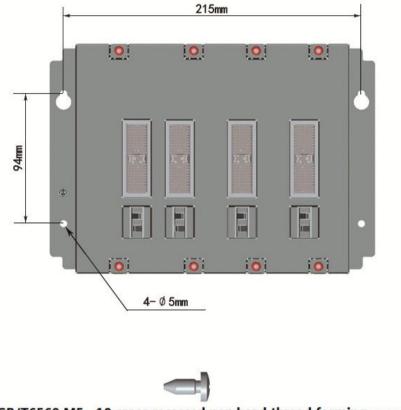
Spatial Layout Requirements Relating to LK Backboard Installation
